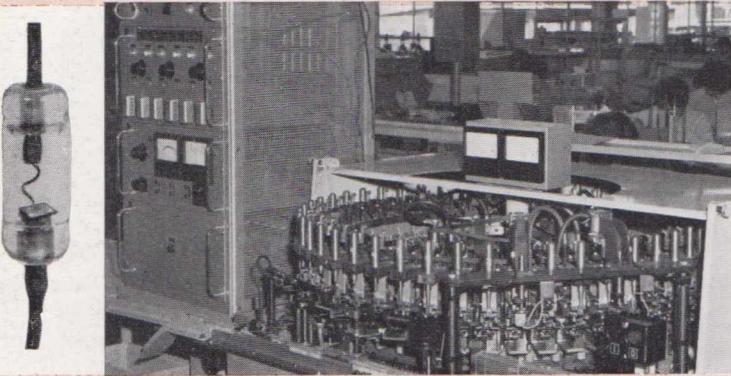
A 48-head testing and sealing machine which assembles the half-diode and anode assemblies. On left is a finally sealed diode.
